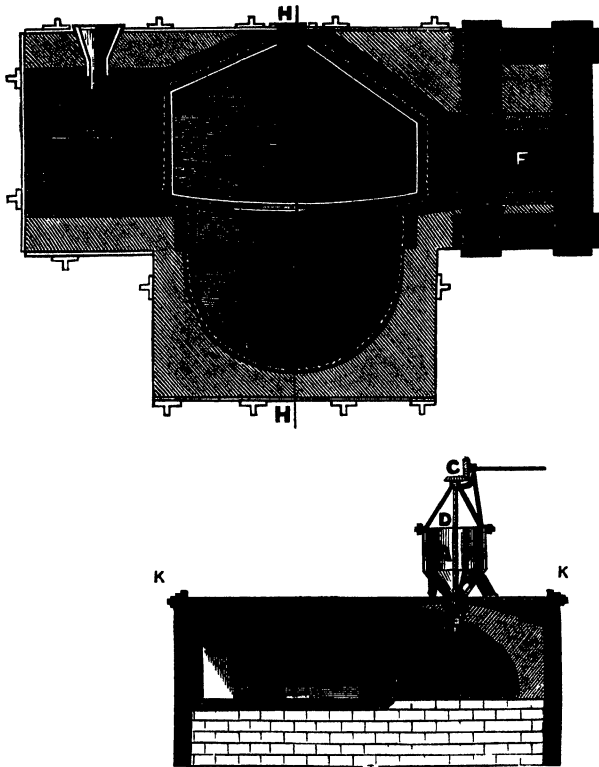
Mr. Clay's Oven and Puddling Furnace. A. The hopper to contain the charge of ore and coal. B. Preparatory oven or bed. C. Wheels to regulate the supply of the mixture. D. Shaft to which the perforated bottom E is attached. F. Chimney, nearly double in area to that which is required on the old system of puddling. The sectional drawing, K K, is taken through B B.
